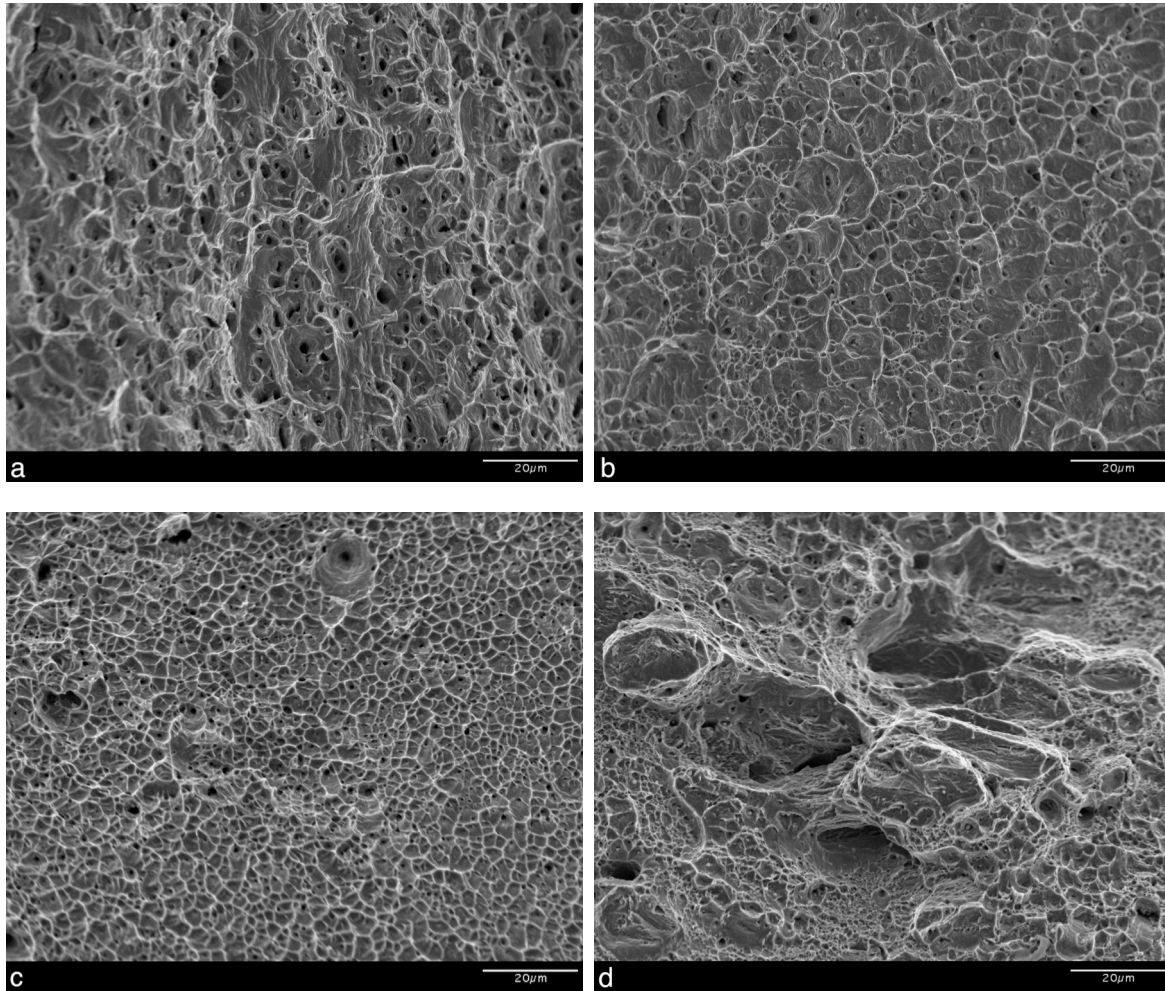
Fracture surfaces of welded type 316L austenitic stainless steel tubing (weld process A), tested at room temperature: (a) non-charged and (b) hydrogen-precharged; and tested at temperature of 223 K: (c) non-charged and (d) hydrogen-precharged.
